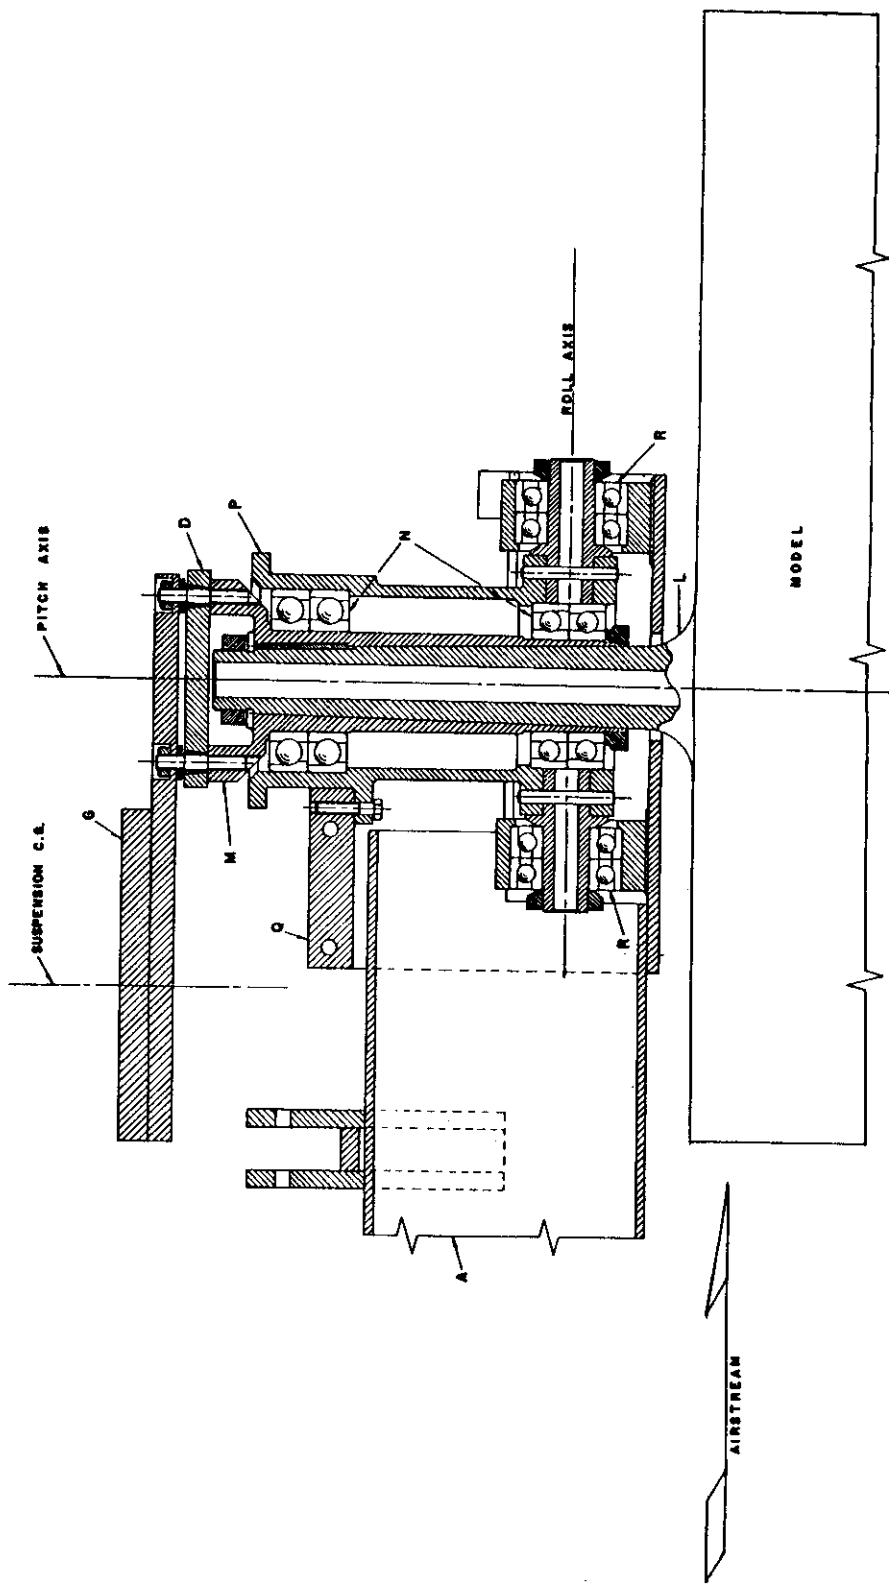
CUTAWAY VIEW OF MODEL SUSPENSION HEAD
